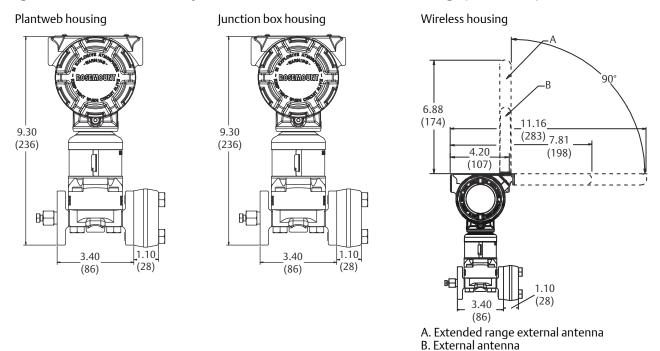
Transmitter with Coplanar Sensor Module and Flange (Side View)
